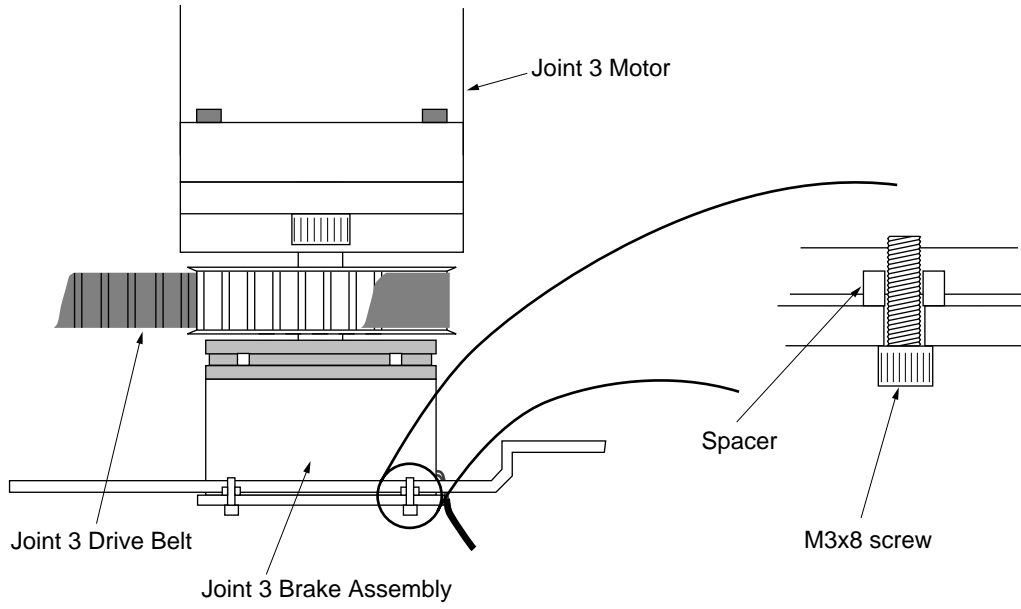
Close-up View of Joint 3 Brake Assembly
